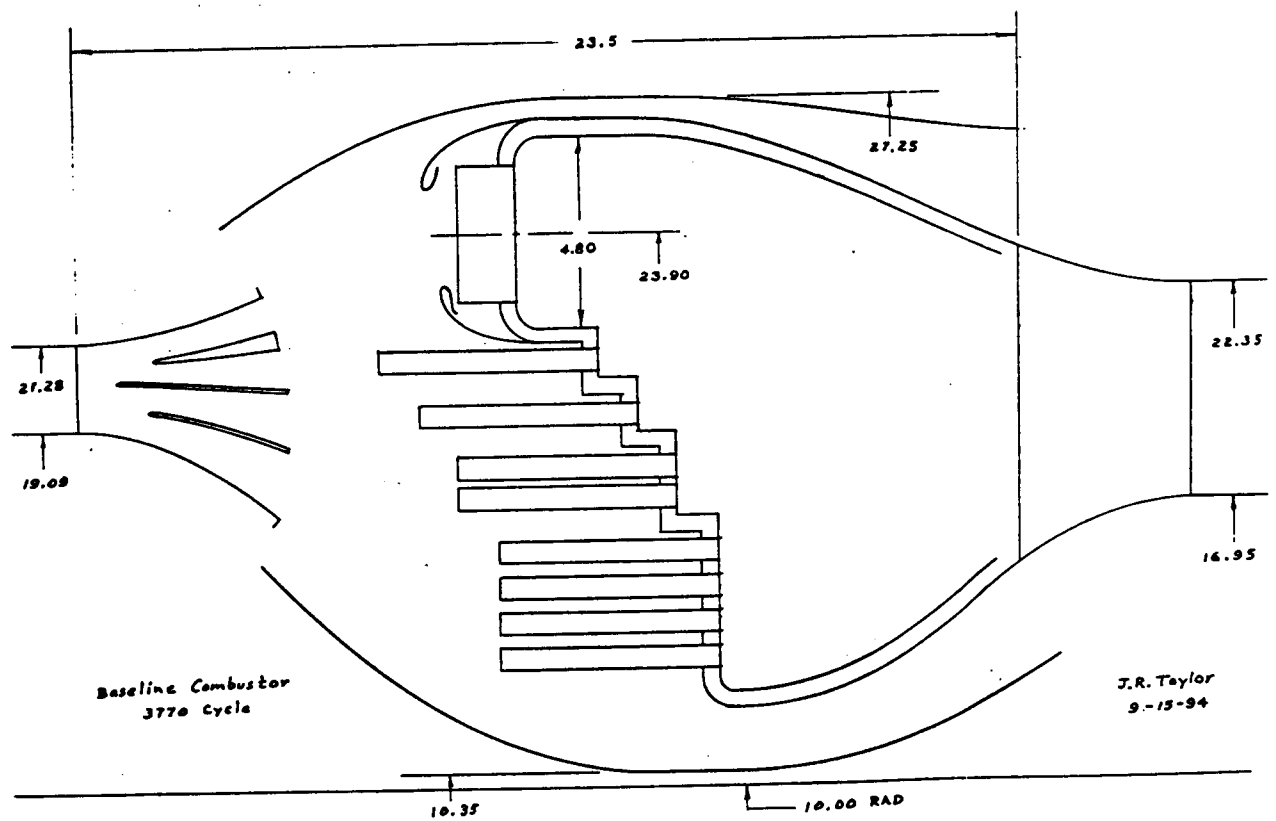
Cyclone Swirler - IMFH combustor with stepped domes. The fuel injector design is not defined. This layout is for a full size engine.
